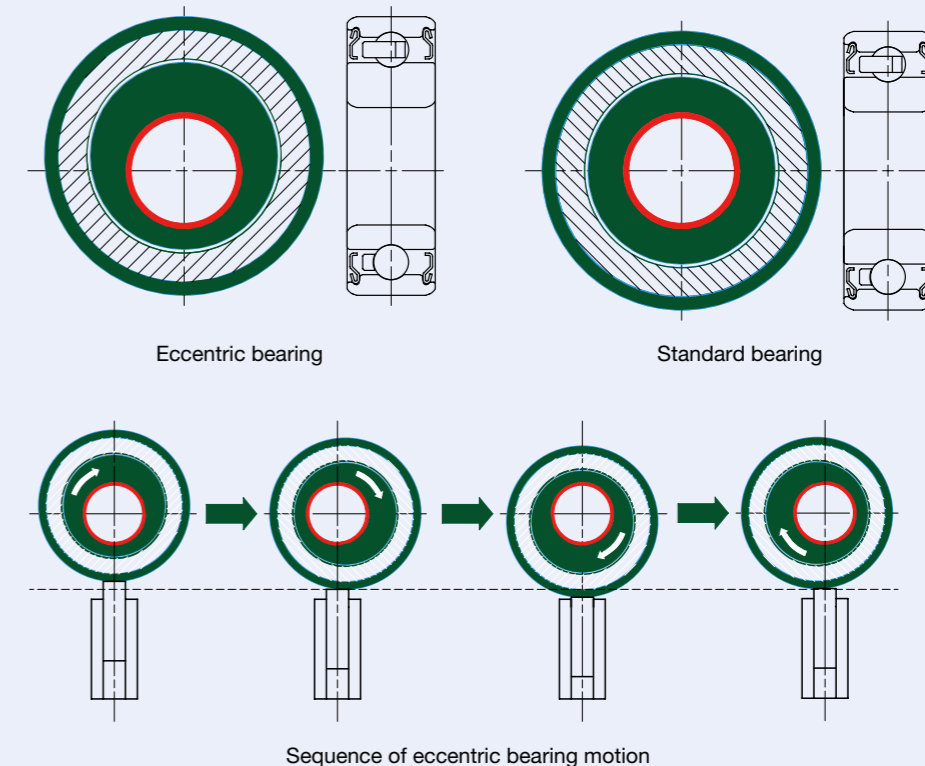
Comparison of standard and eccentric bearings; and the sequence of eccentric bearing and plunger motion¹⁾
